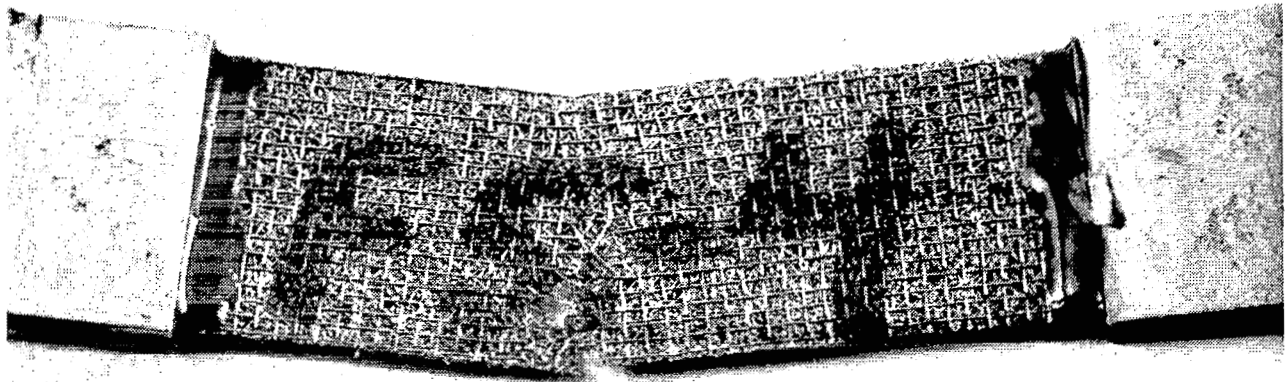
Closeup view of failure of 10-cgs rayl fibermetal tensile specimen.
